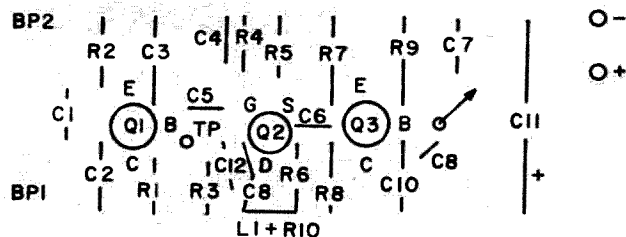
Component layout. Use a piece of clipped lead for the test point. Check the data on your FET for pinout before installation.
